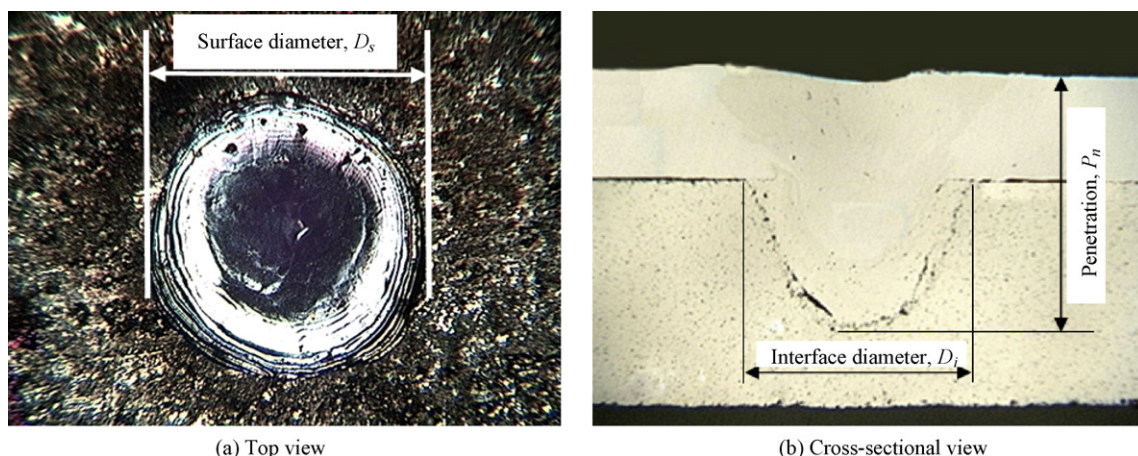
Characteristic dimensions of a spot weld. (a) Top view. (b) Cross-sectional view.
